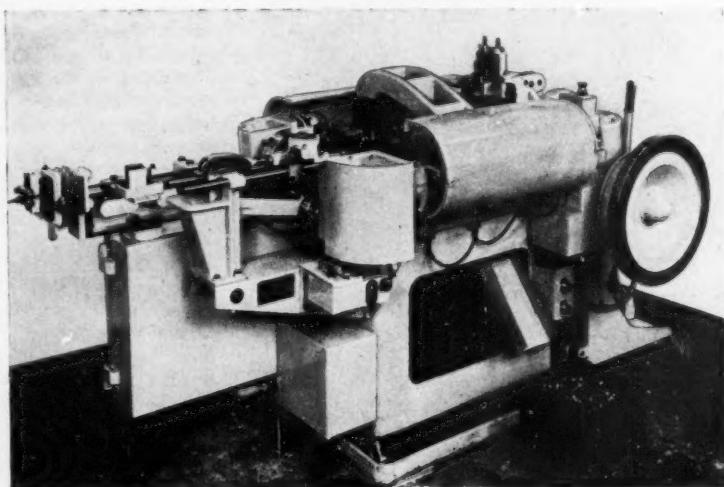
British-built Type No. 28 U.S. Multi-slide Machine, which is being Exhibited by Rockwell Machine Tool Co., Ltd.
